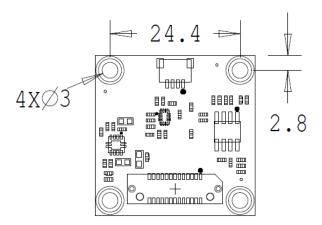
Front View of e-CAM81\_CUONX Adapter Board Mechanical Dimensions
